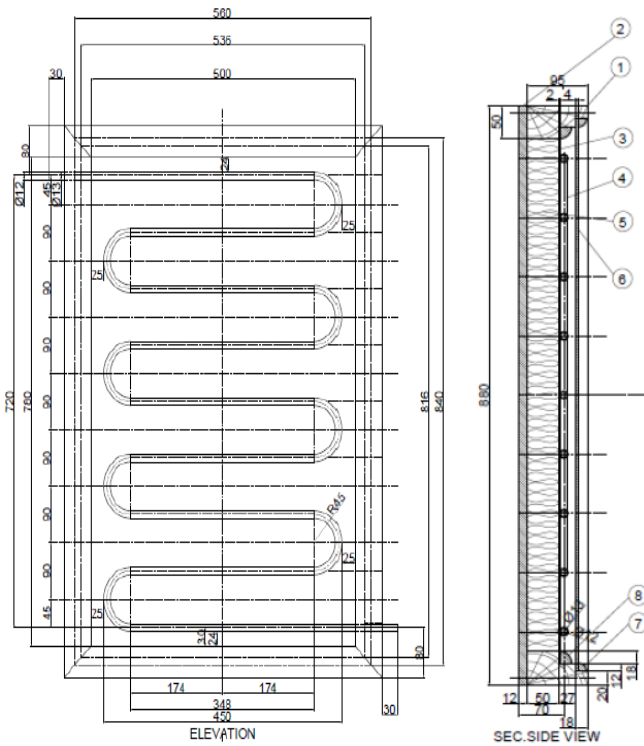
Elevation of the designed solar flat plate collector. Figure (4-3) Section side view of the designed solar flat plate collector.
